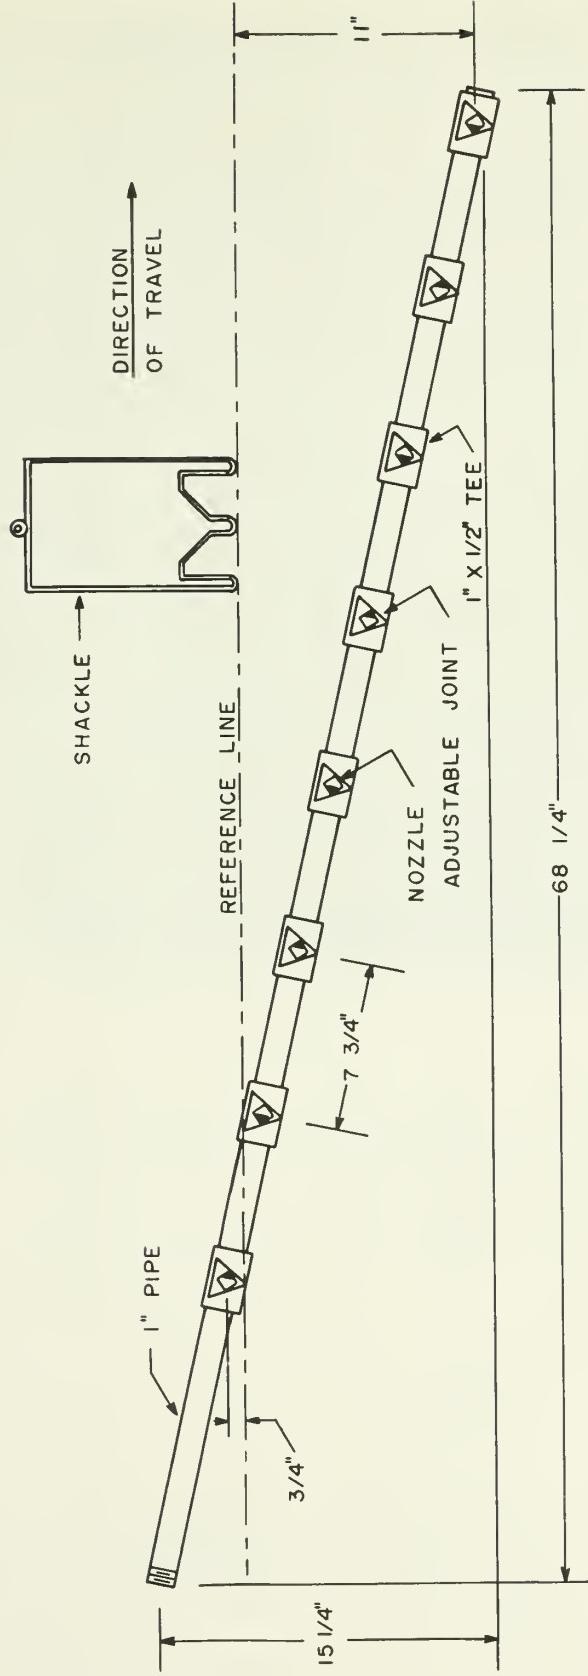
Side view of washer assembly showing orientation of nozzles relative to bottom of shackle line.
